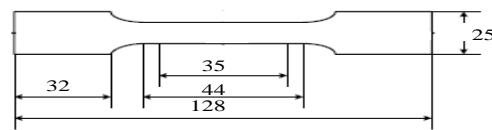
B, Flat Tensile Test Specimens (dimensions are in mm)
